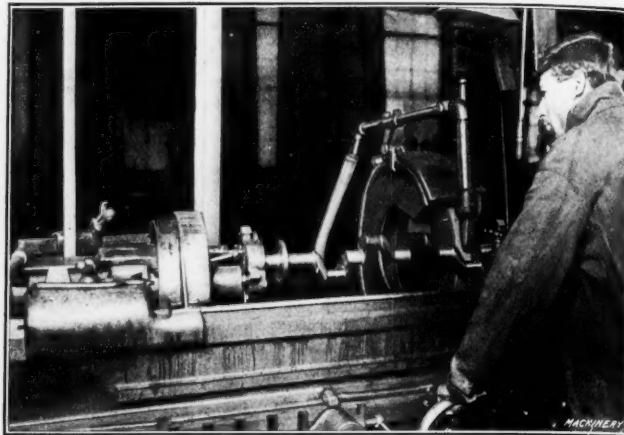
Rough-grinding the Crank-pins in a Norton Grinder
